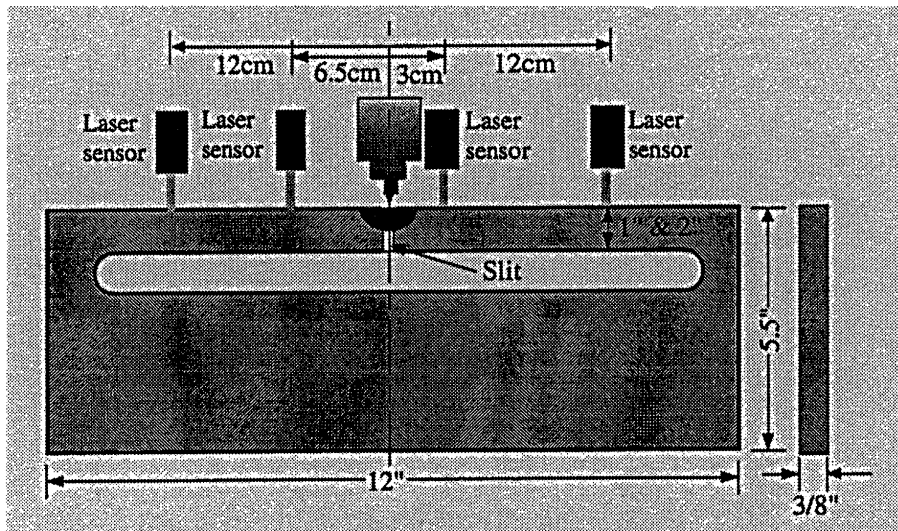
Restrained beam model with bead-on-plate and butt welding at 1" (25mm) and 2" (50mm) deep.
